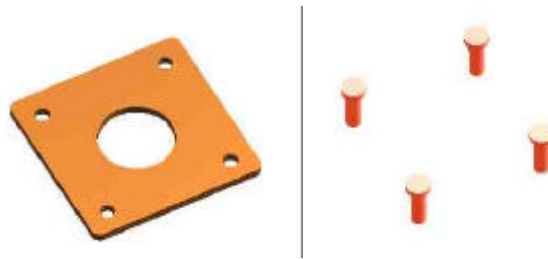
The plate (plaquette) and the four screws (vis) used to fasten it.
